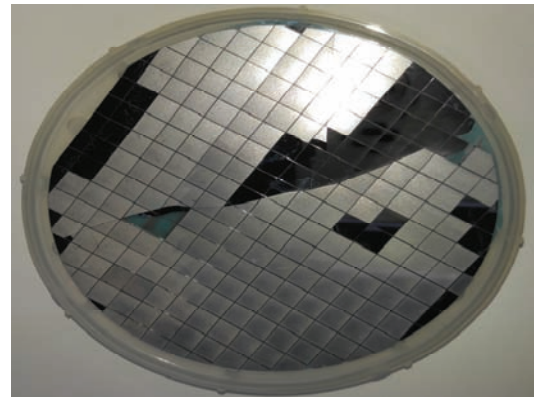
Silicon samples after dicing using a diamond sawing tool.
